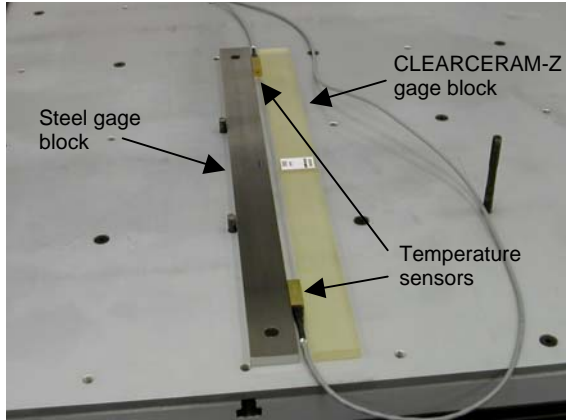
Setup for the in-situ calibration of the workpiece temperature system.
